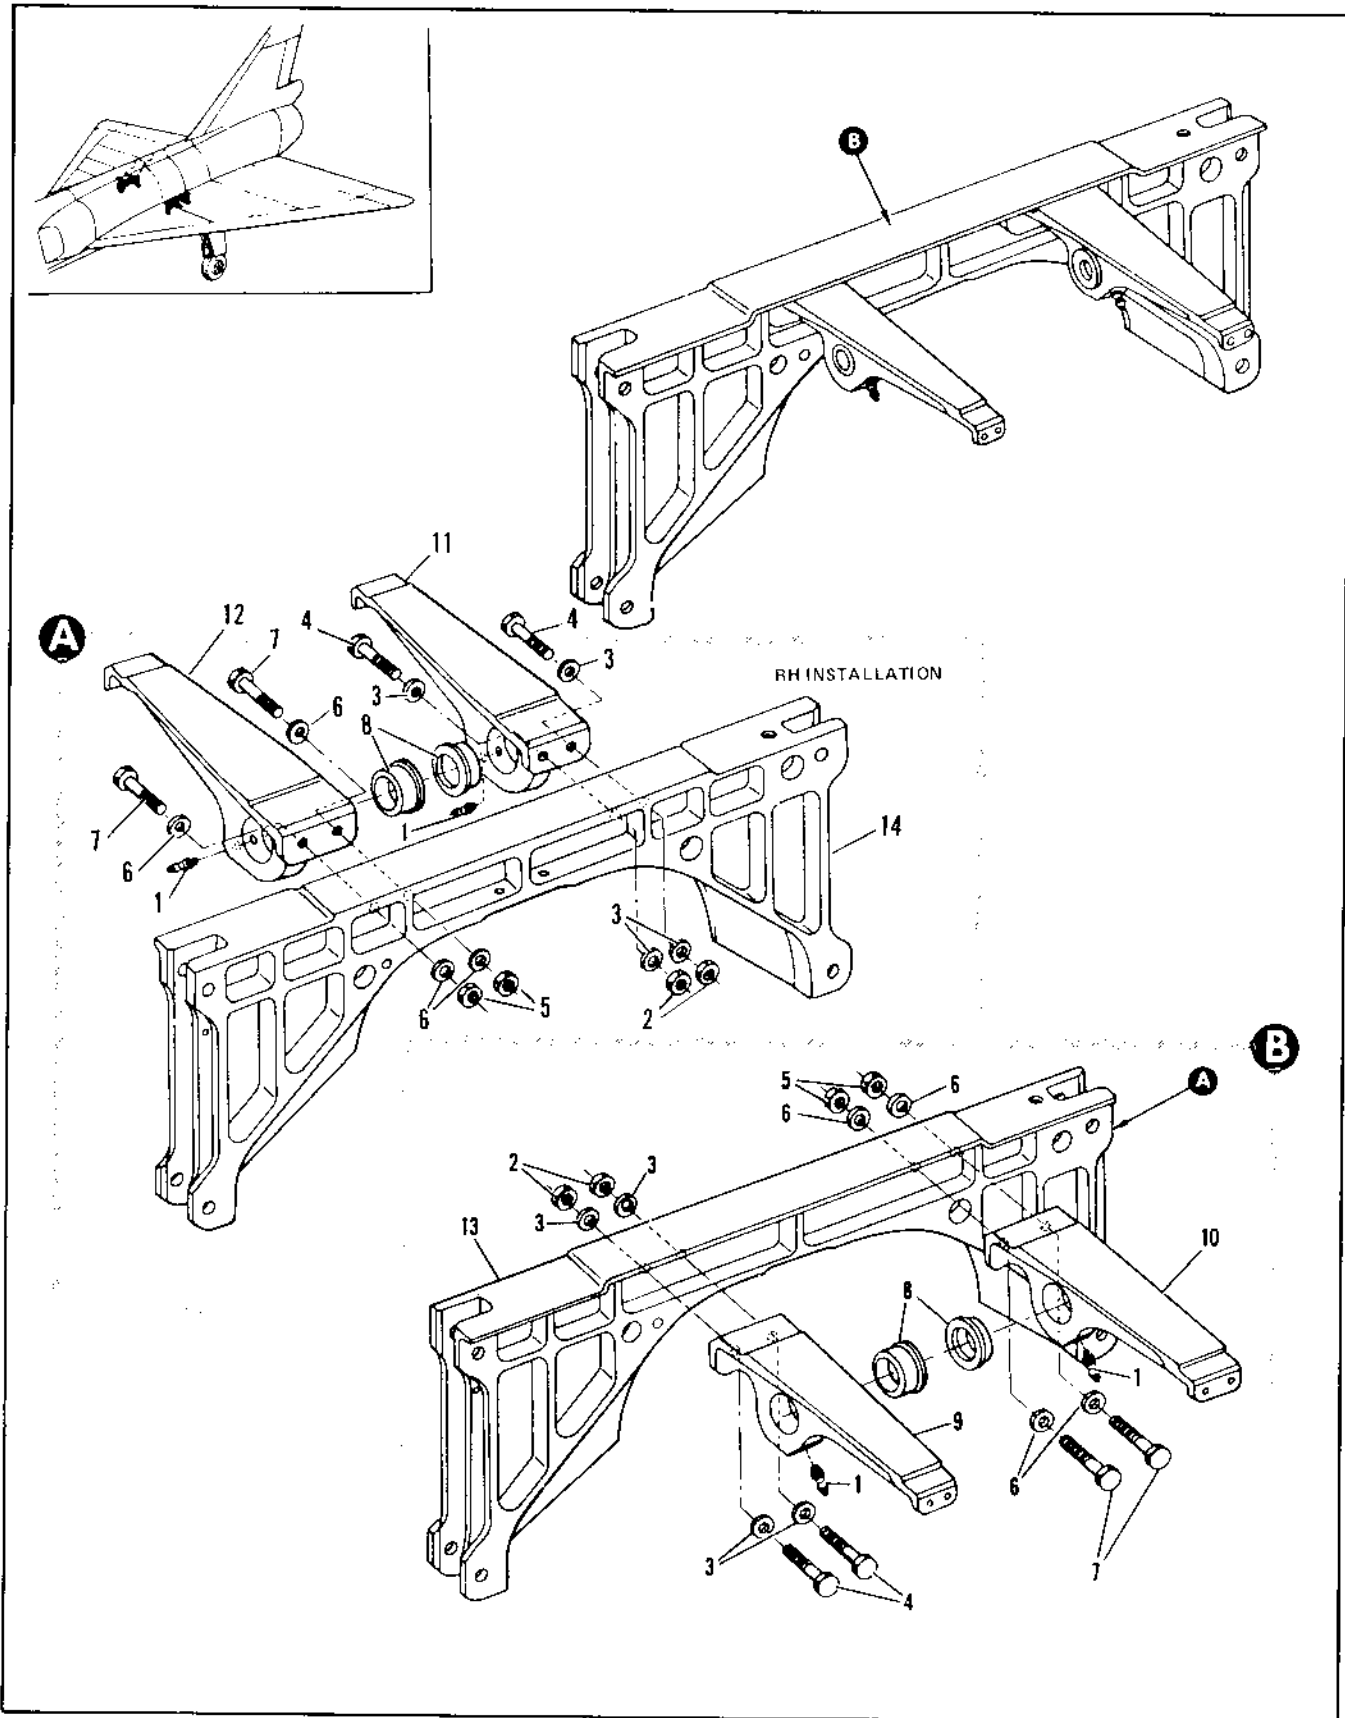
Main Landing Gear Fitting Assembly BL 38
